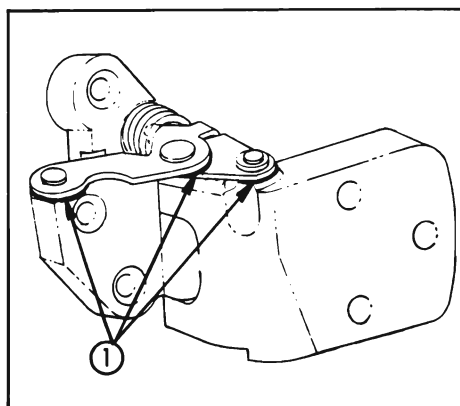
Rear Door Hinge and Hold-Open Assembly
